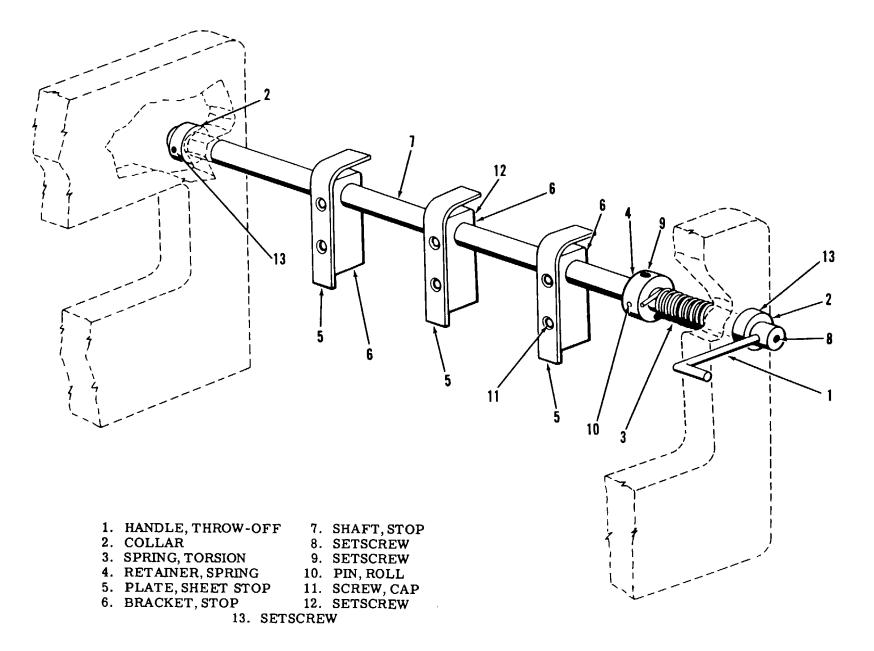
Paper Sheet Stop Assembly, Exploded View.
